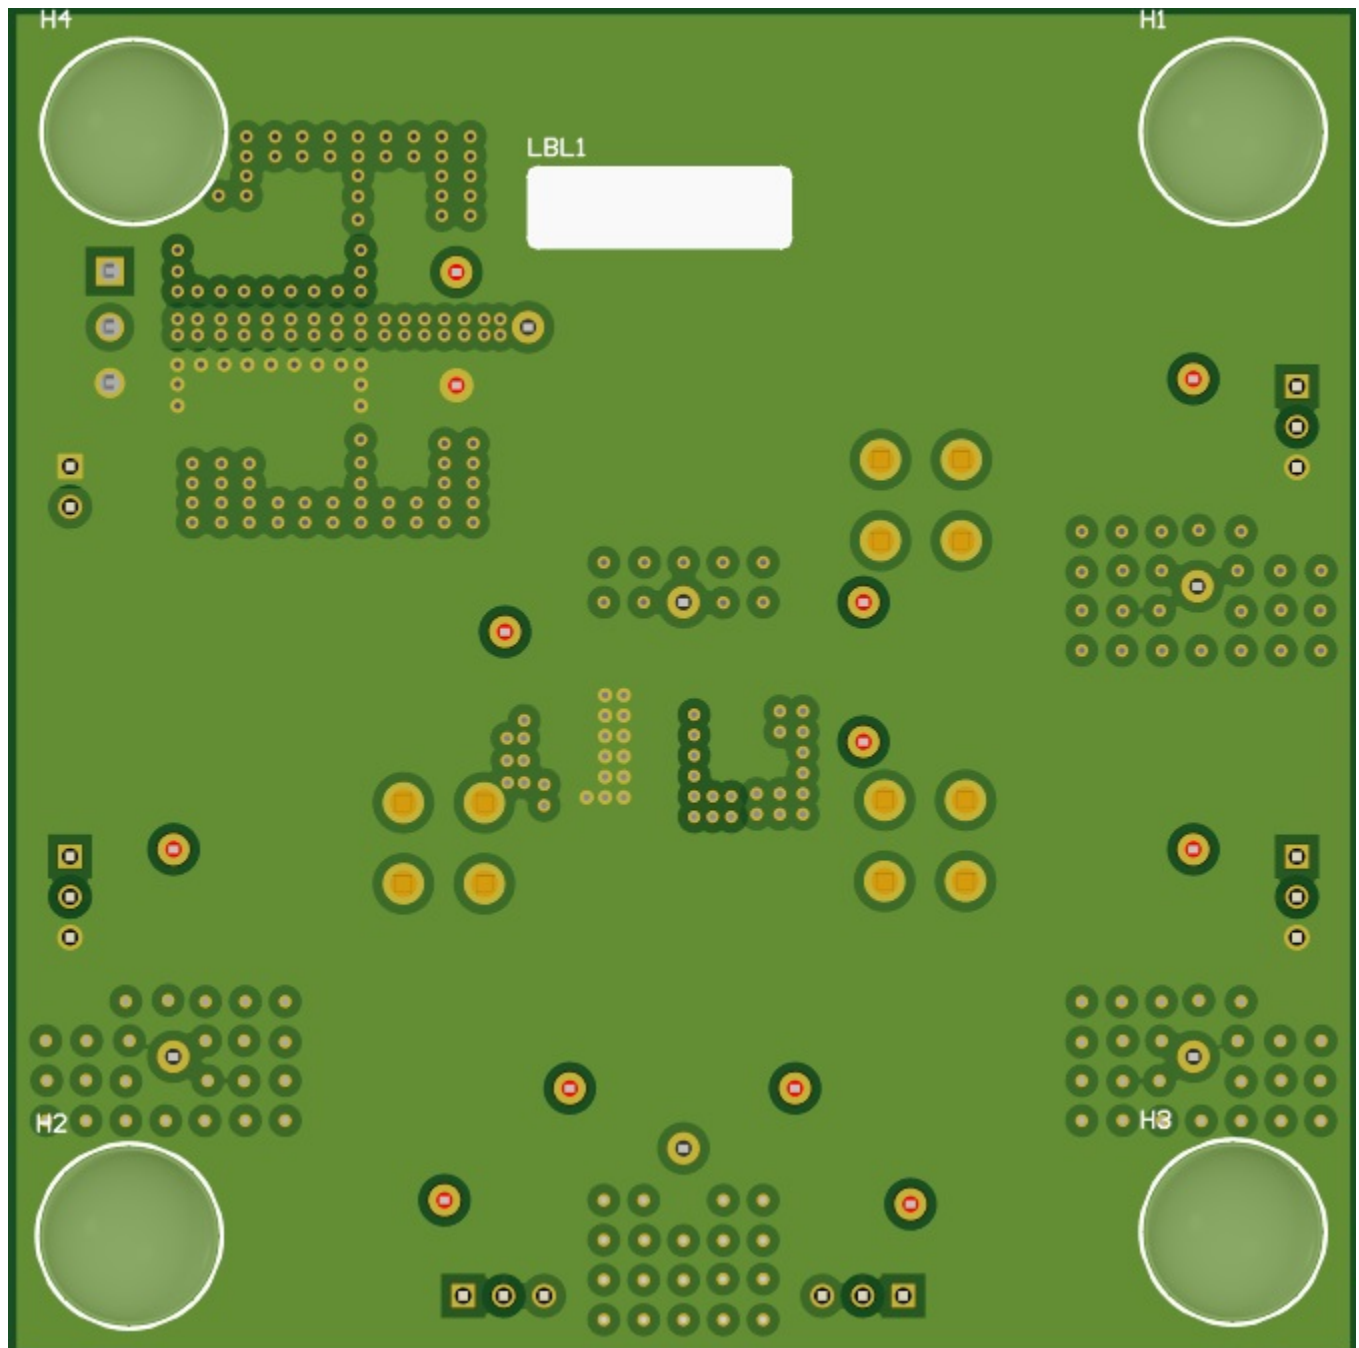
Bottom View Illustration of the TMUX72XXDGKEVM Layout
